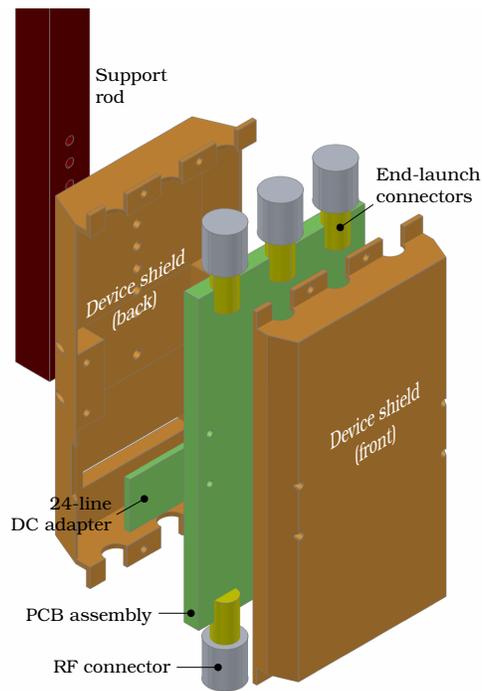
A exploded rendering of the lower section of the device mounting assembly including the PCB assembly. The support rod extends upwards to connect the assembly to the mixing chamber plate.
